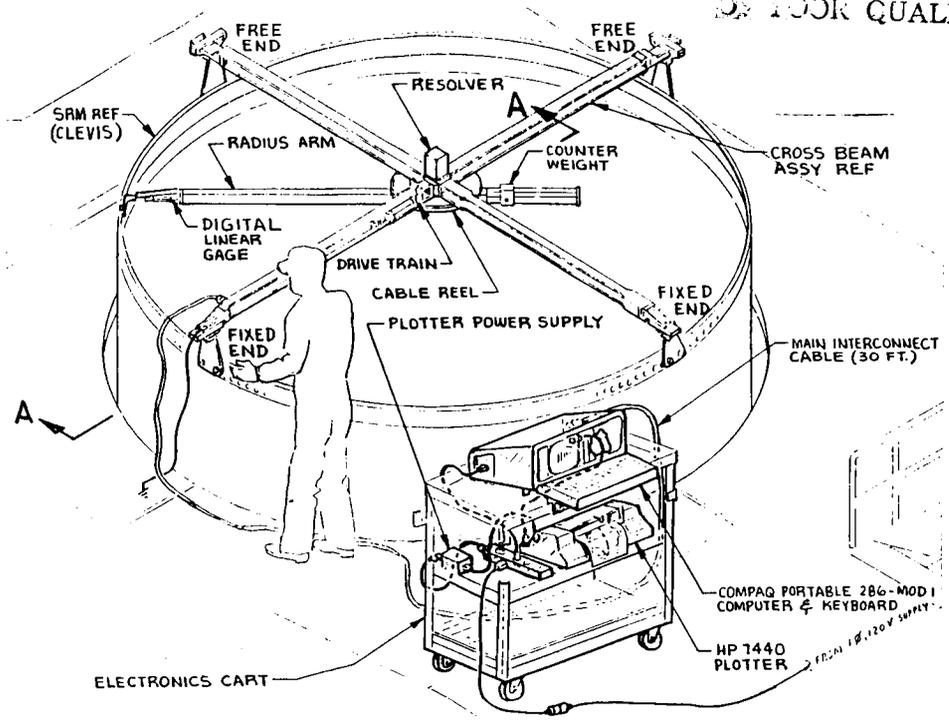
SRM Measuring Tool Assembly, P/N 97M50225
